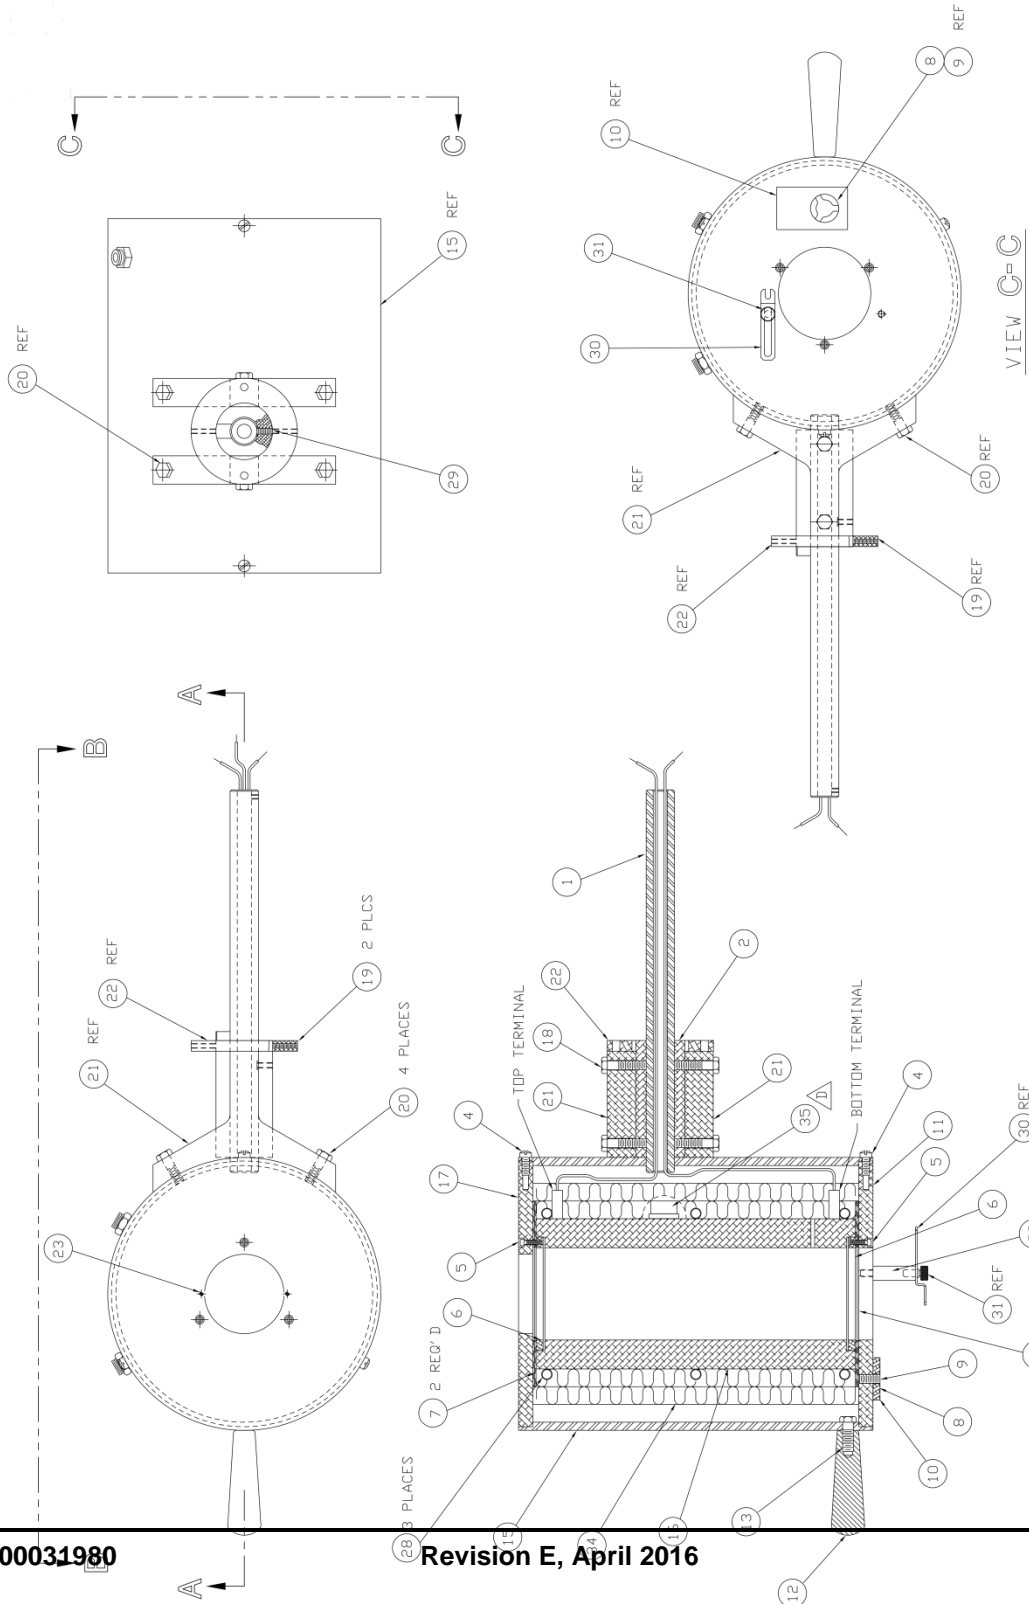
Heating Jacket Assembly Schematic, Part 1 of 2
